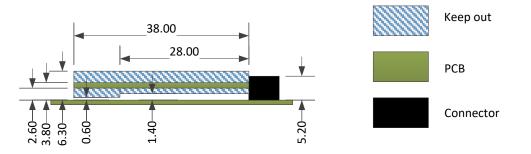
MitySOM-AM62 Module Clearance - Side View, all dimensions in mm
